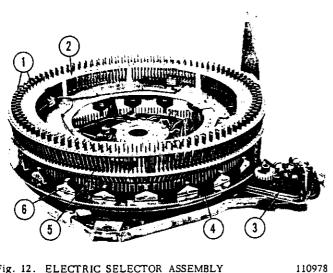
ELECTRIC SELECTOR ASSEMBLY
